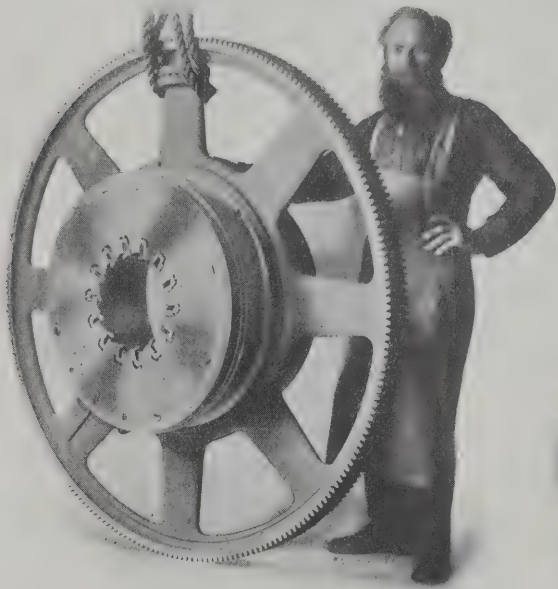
Main Driving Gear of the Gorton Cutting-off Machine
